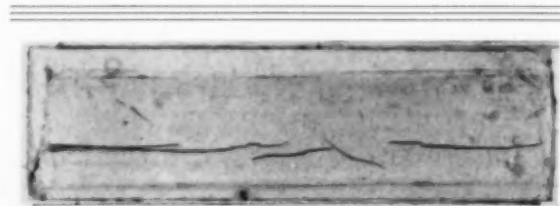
Transfer Print of Magnaflex Markings on Side of a Gear Tooth That Failed by Spalling, Undoubtedly Originating in Grinding Cracks
